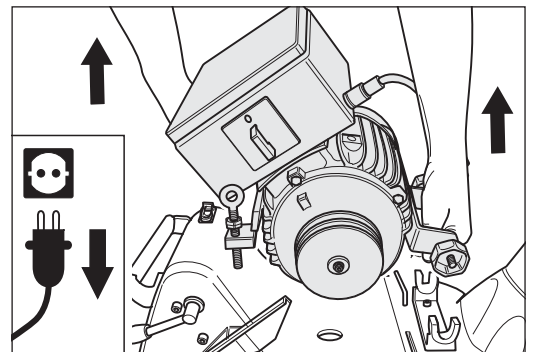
Remove the motor from the machine housing. Similar to figure.
